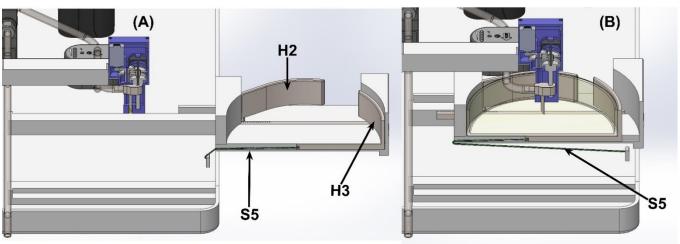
(A) Side cut section open position view, (B) Side cut section closed position view of automatic cell culture dish holder
